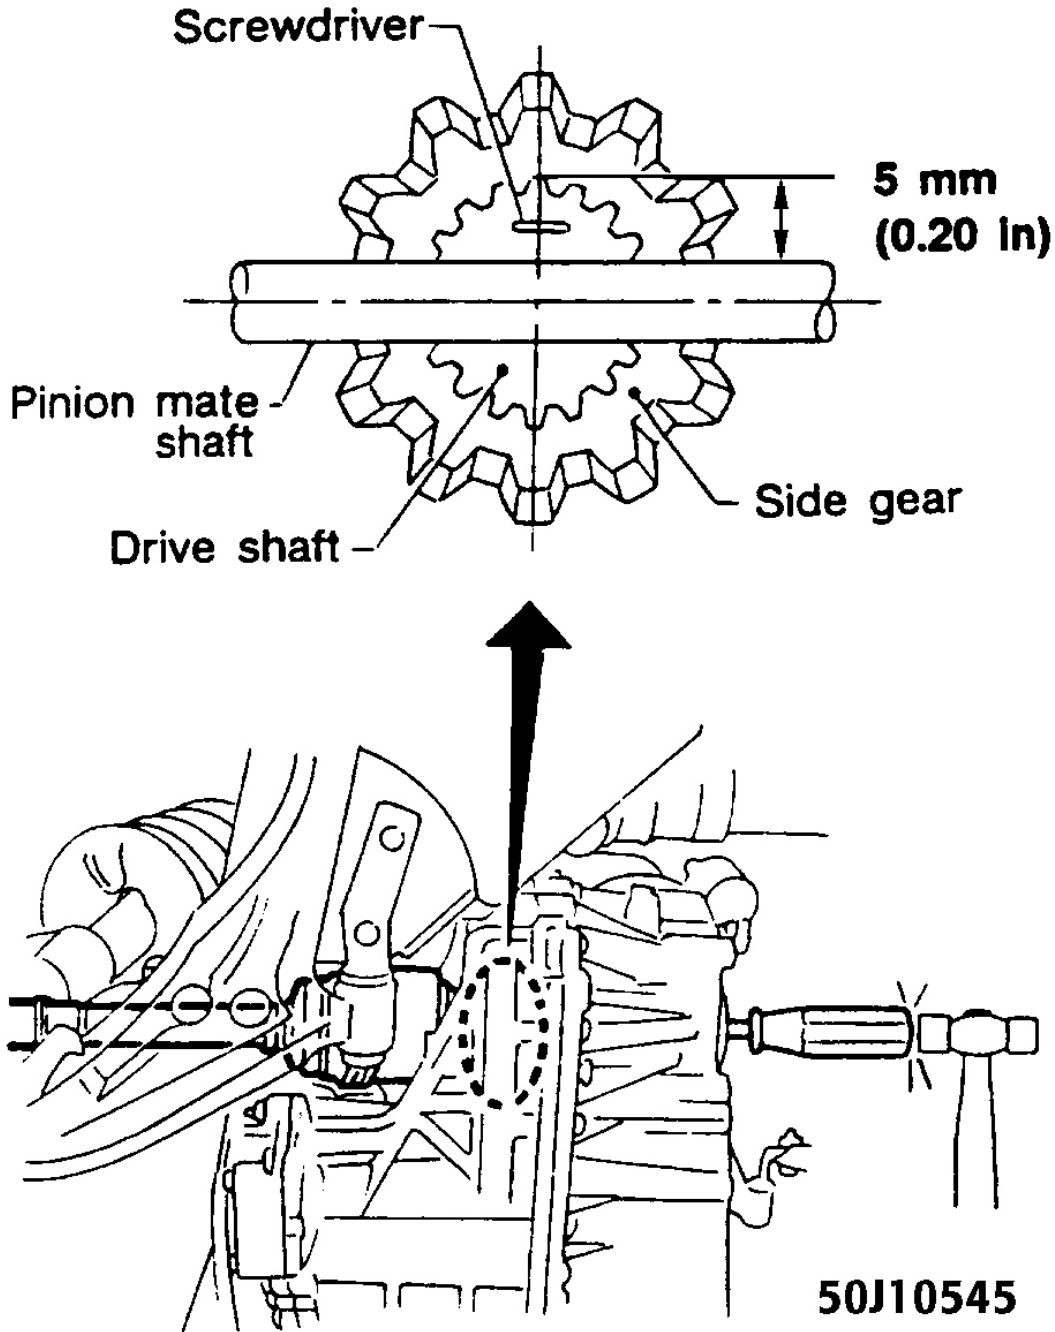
Removing Axle Shaft (A/T Left Shaft)
